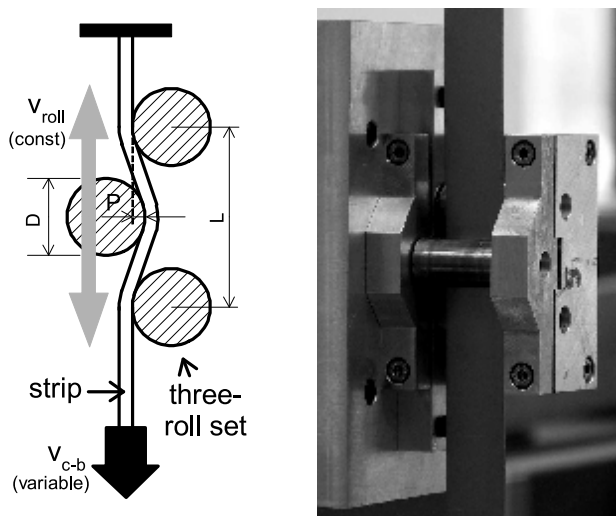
The test equipment. The specimen is held fixed at the top and is pulled downwards in the tensile testing machine. Left: schematic representation, right: picture of the roll set with a specimen mounted in position.
